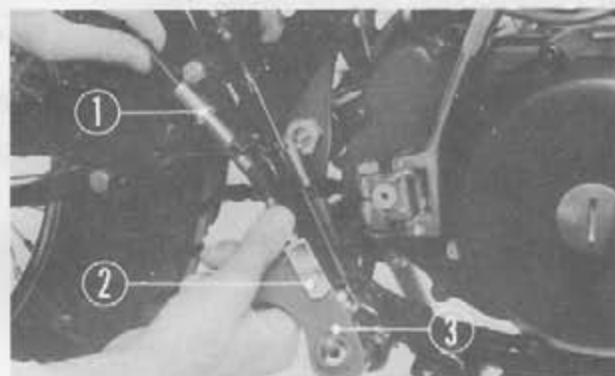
① Rear brake cable ③ Rear brake pedal
